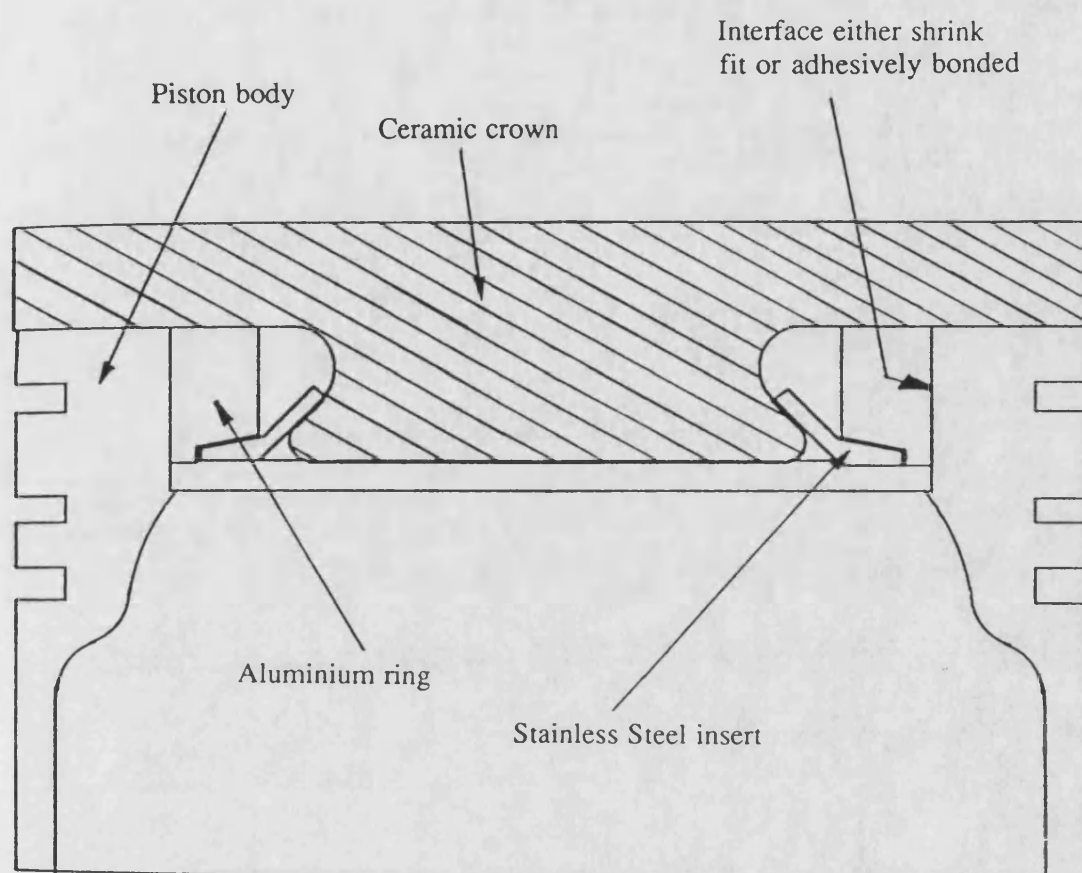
Half sectional view of shrink fit or glue line cap attachment.
